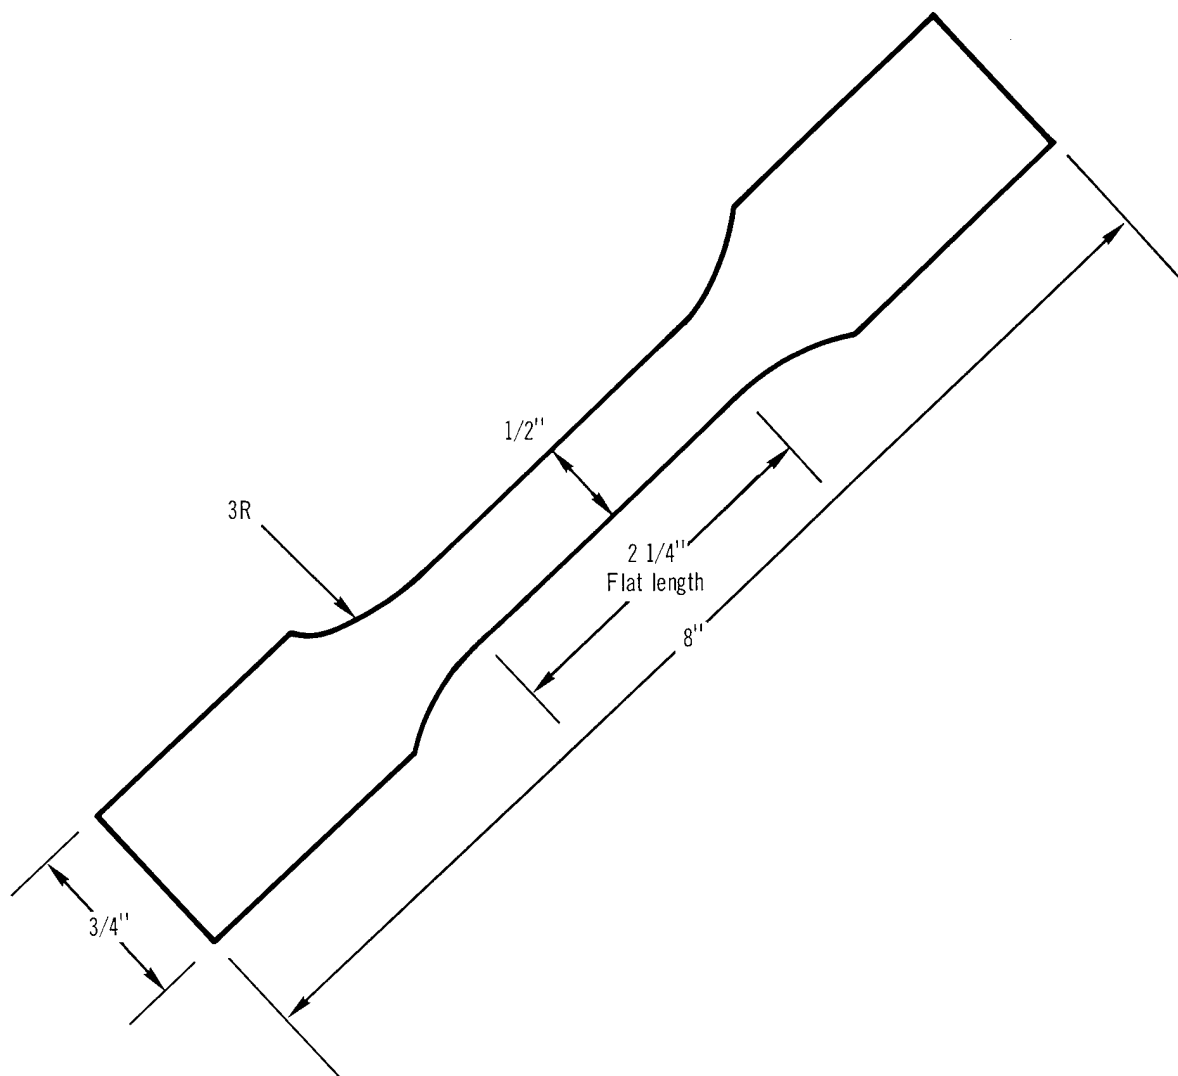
Tensile Test Coupon, ASTM Standard D638-61T
